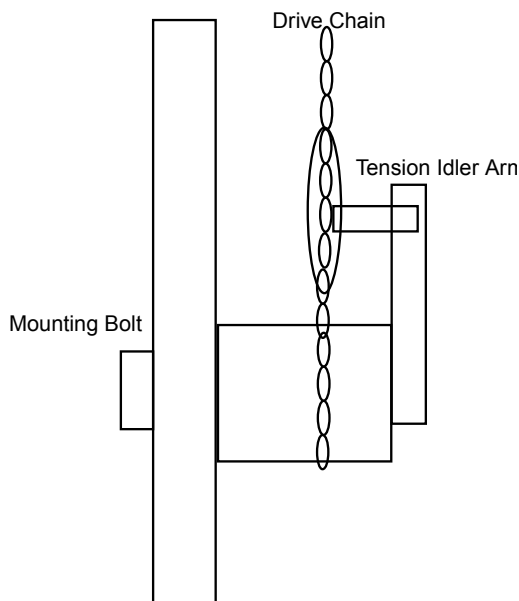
After loosening the mounting bolt, use a crescent wrench to move the tensioning idler arm.
